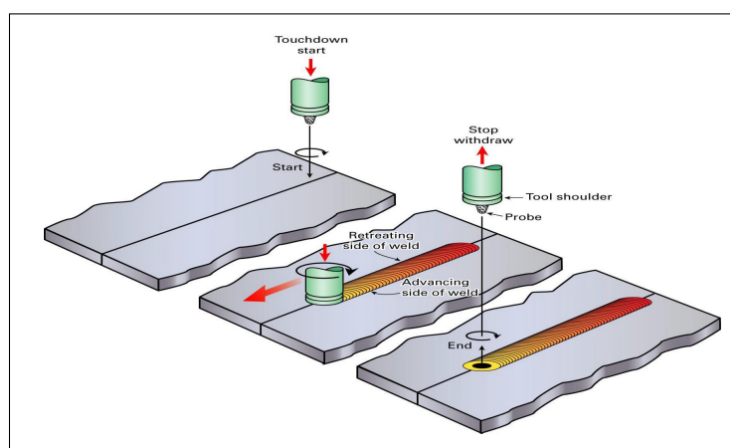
Schematic of Friction Stir Welding process[2]
